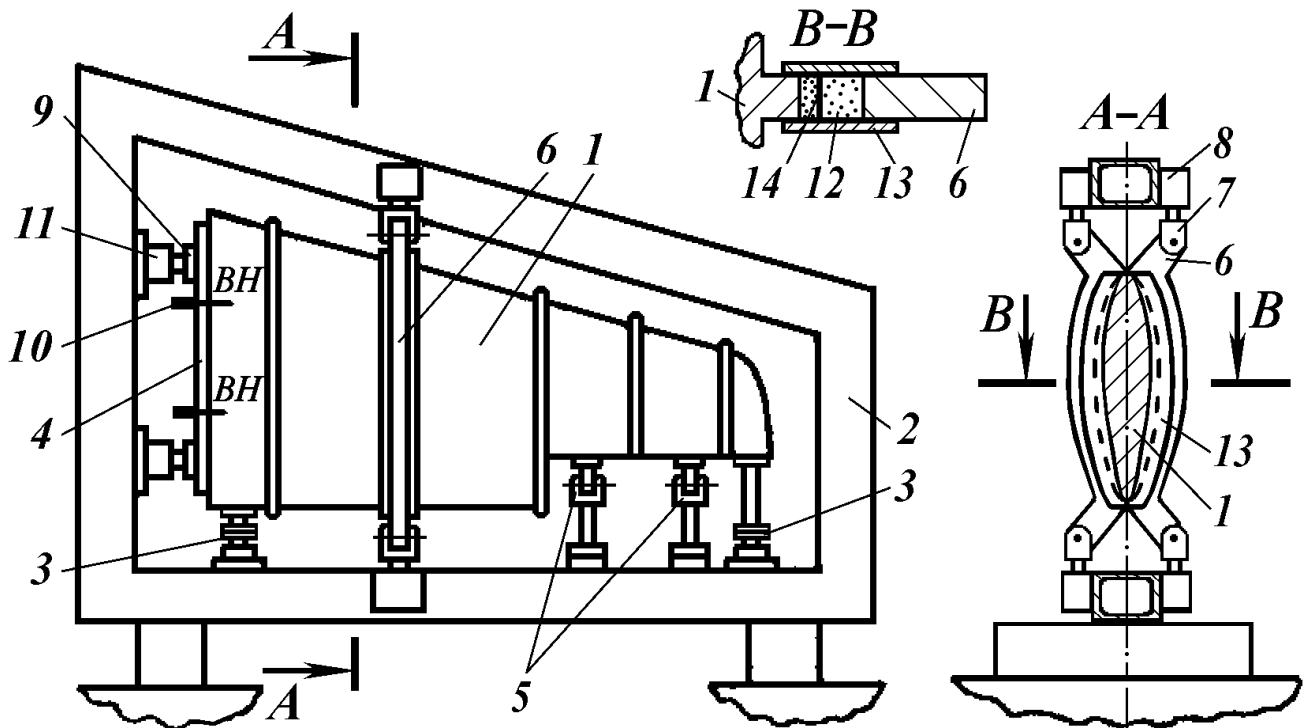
Mounting of the assembly jig with using of mounting standard: 1 – mounting standard; 2 – assembly jig frame; 3 – the reference platform; 4 – locator of the flat junction (jigging plate); 5 – locators of fork-shaped junctions; 6 – outline (contour) locator (the fixing arm); 7 – fork of the jig (eye-bolt); 8 – jig barrel; 9 – bracket; 10 – pin; 11 – jig barrel filled with the cement НИАТ-МЦ; 12 – carbinol cement; 13 – technological plate; 14 – separation material
